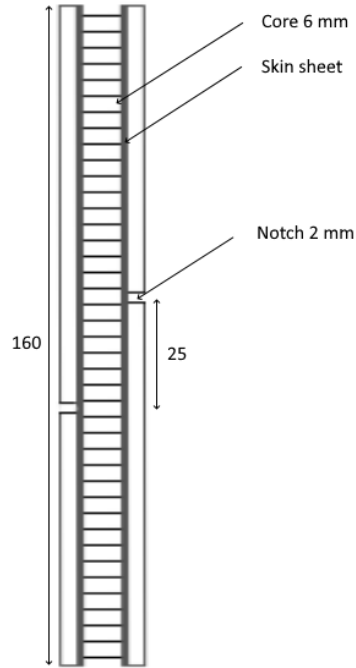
The schematic of the specimens for the NSS test resembling ASTM D 5868. All dimensions are in millimeters.
